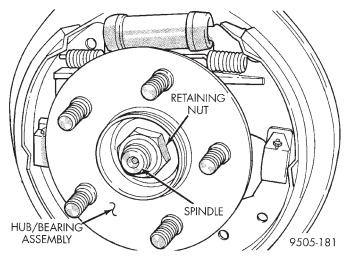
Hub/Bearing Assembly Retaining Nut plate when removed, must be supported using mechanics wire as shown in (Fig. 12).
